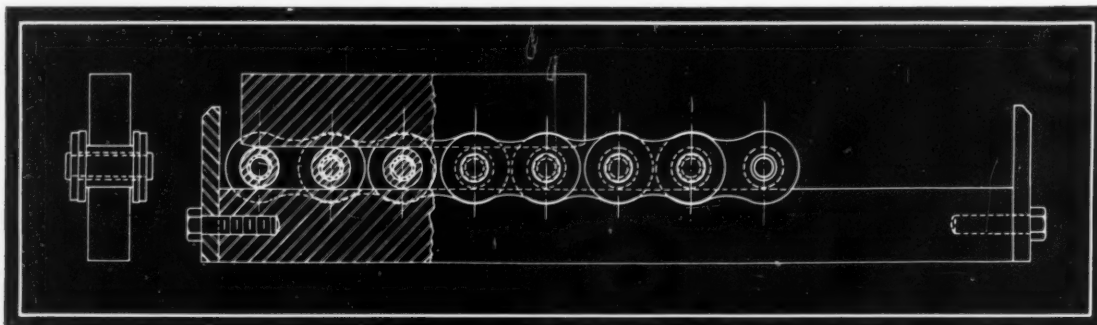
Side links of a standard roller chain form side guides in its application for this rectilinear roller bearing. Hardened and ground rails are employed
